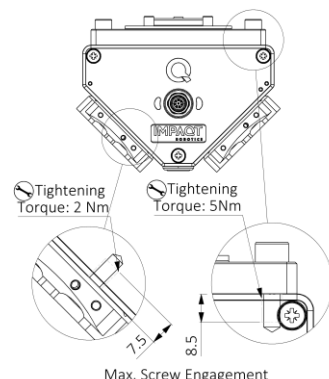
Maximum screw engagement for PQ90's robot and tool couplers
